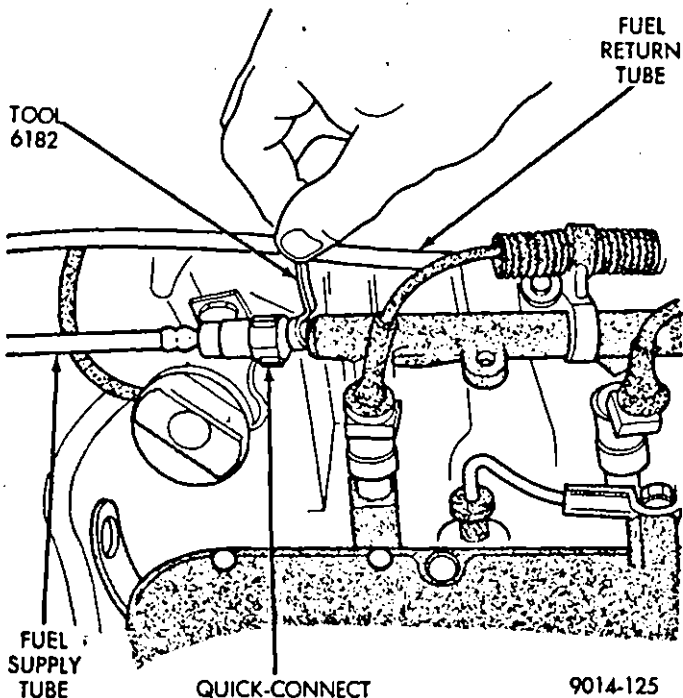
Disconnecting Fuel Supply Tube at Fuel Rail—MPI
